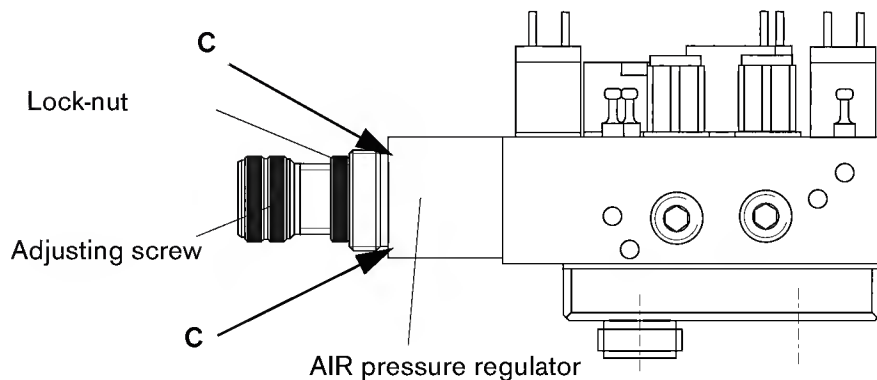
Dräger Gas connection block with AIR pressure regulator
